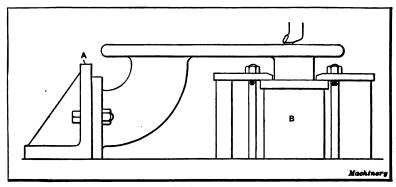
Use of Angle-plate in Conjunction with Clamps for Holding Work
